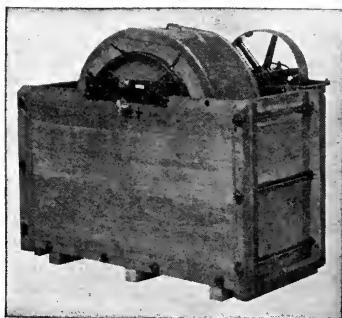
SCHULTE MECHANICAL GALVANIZING BARREL
